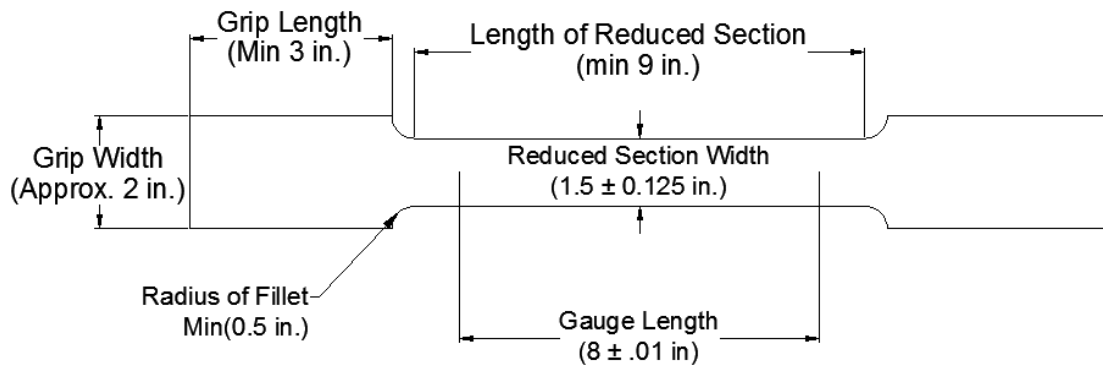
Standard Coupon Dimensions and Tolerances
